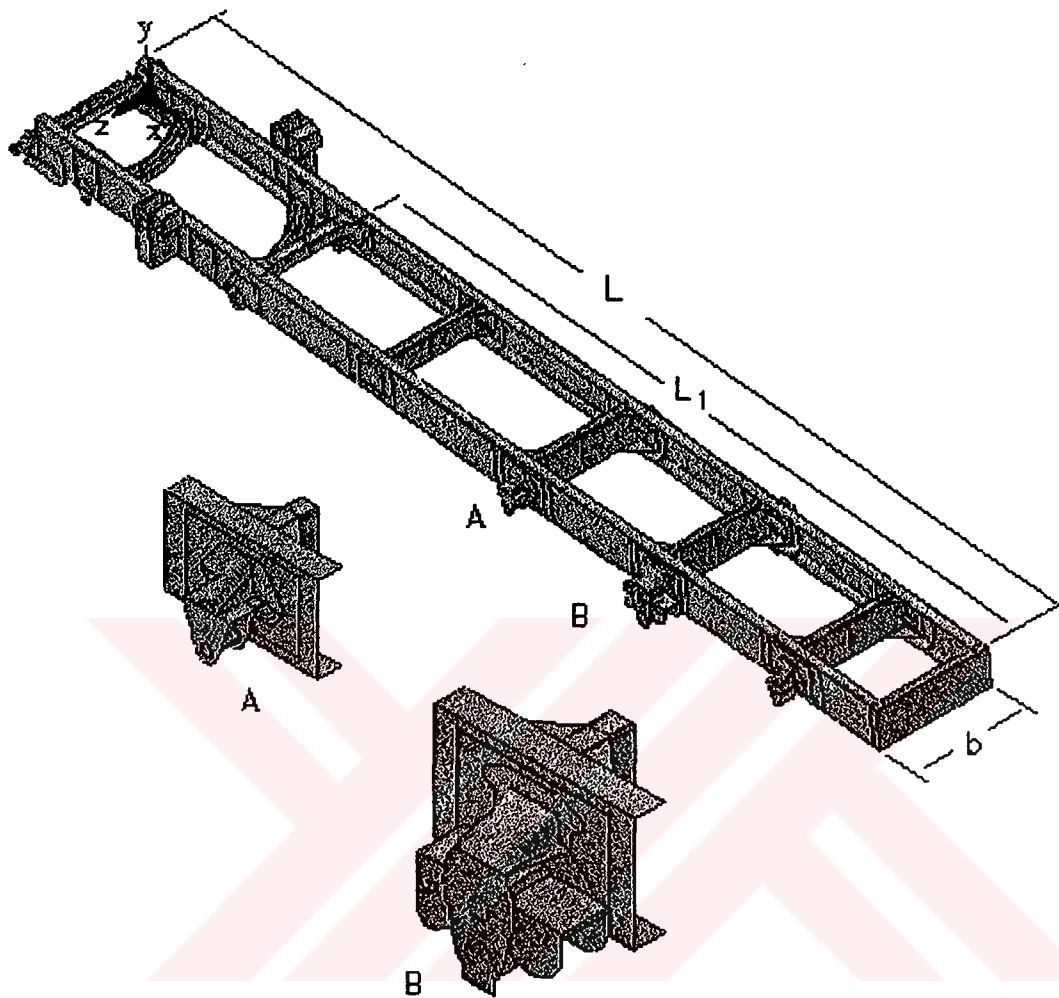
b. Chassis frame model(2) which has a movable spring hanger.
